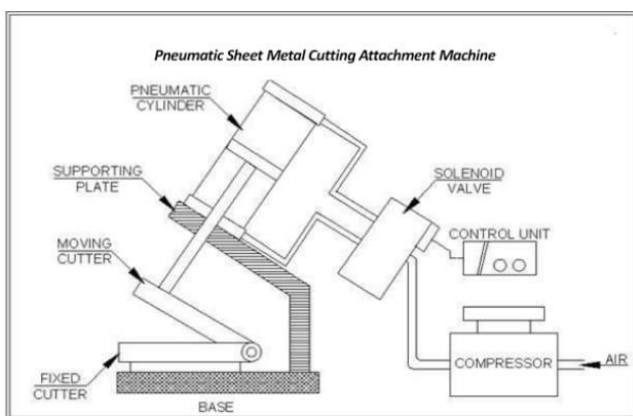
Pneumatic Sheet Metal Cutting Attachment Machine
